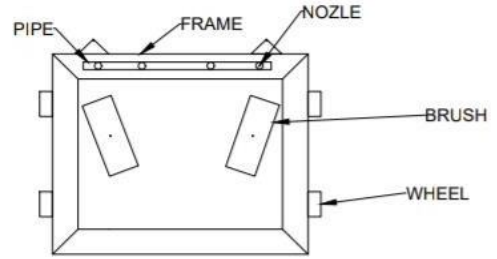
2D Diagram of Back Side of Cleaning Machine
